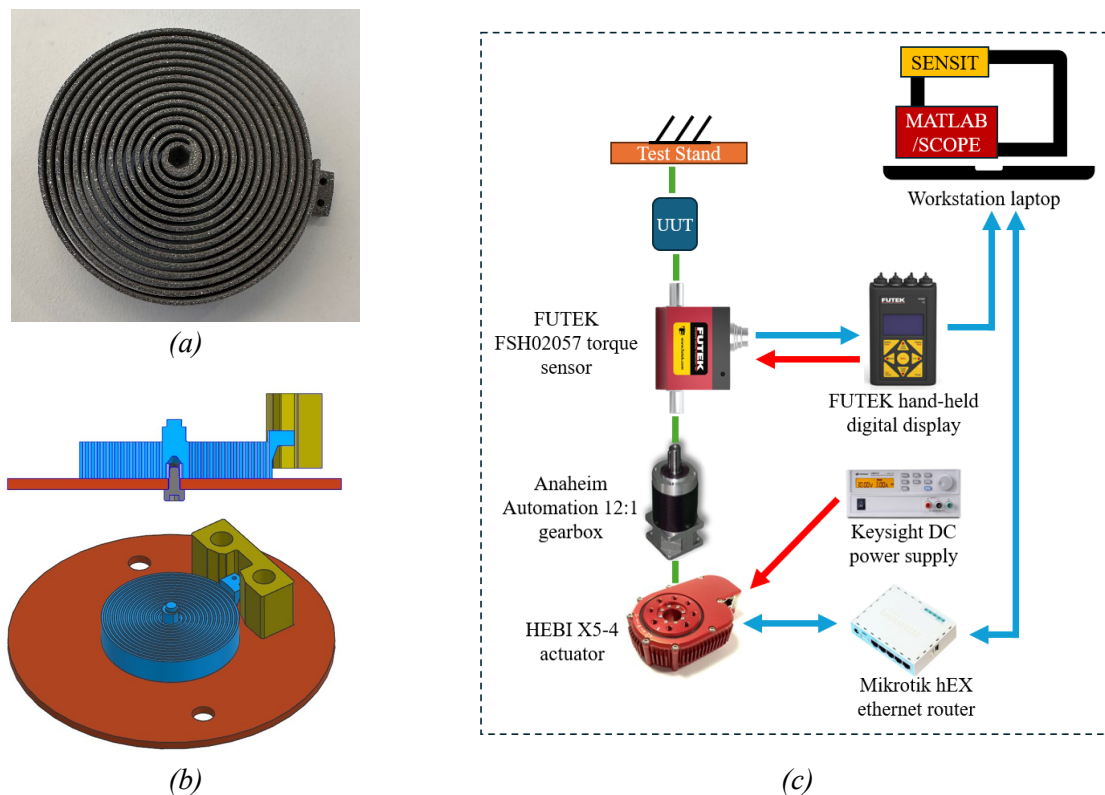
(a) The hexagonal socket feature in the bottom of the Titanium springs, (b) a cross-section and isometric view of the spring interfaces to the test stand, & (c) a system diagram of the torsion test stand.
